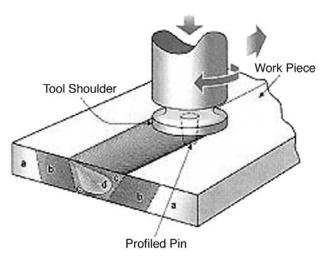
Friction stir joining and processing are accomplished by plunging a spinning tool into a material and translating the tool across the surface to form either a joint or a surface processed region (TWI, Ltd.).
